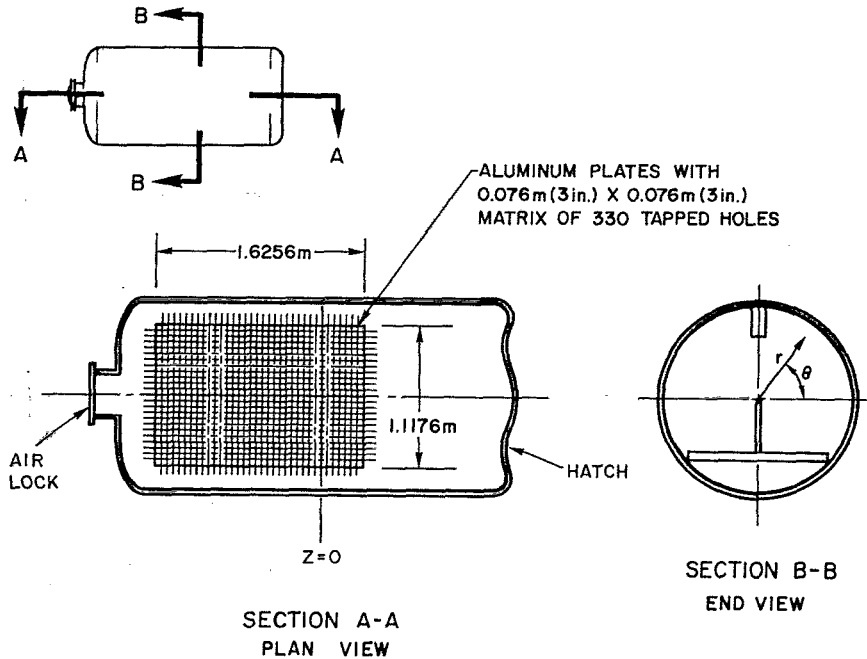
Plan and end views of Tank 2 showing cylindrical coordinates and matrix of 330 tapped holes
